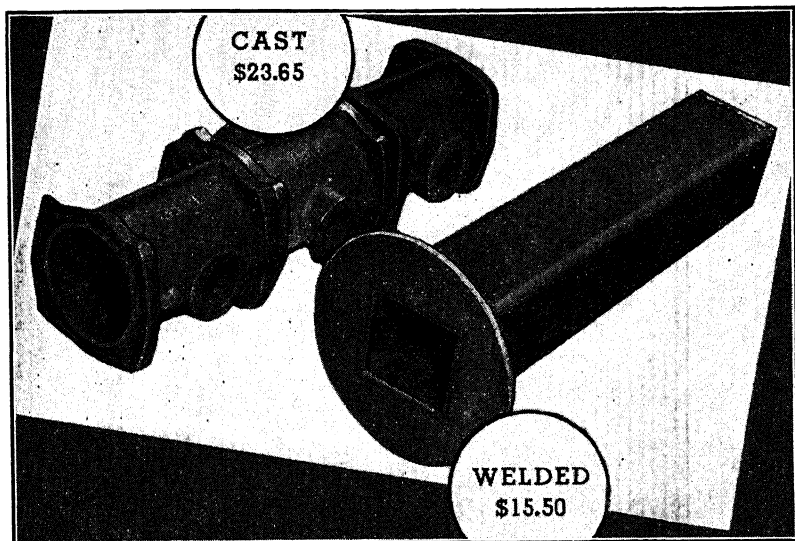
Both parts are partially completed headers for a metal washer. The cast iron header consists of a bolted assembly of castings, costing \$23.65, complete. The welded steel header is built from two 4 x 4 x 1/4 angles and plate and costs only \$15.50, complete. The changeover yielded a savings of \$8.15 on every header of this size produced.
